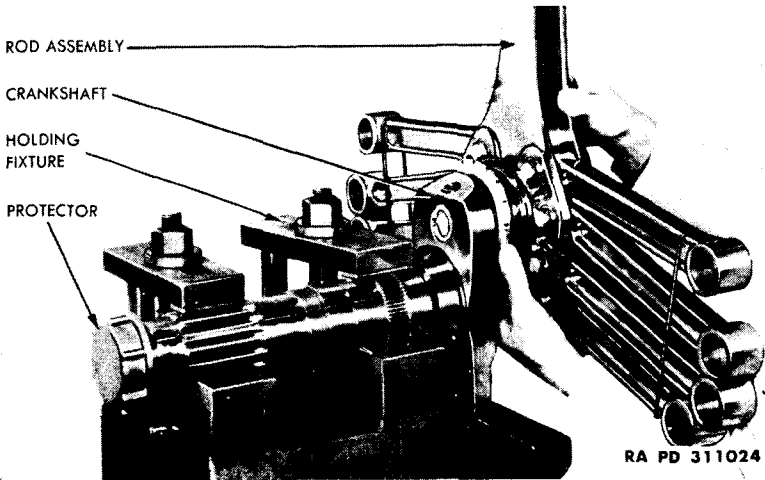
Removing Rod Assembly, Using Fixture 5A2296 and Protector 5A2342
